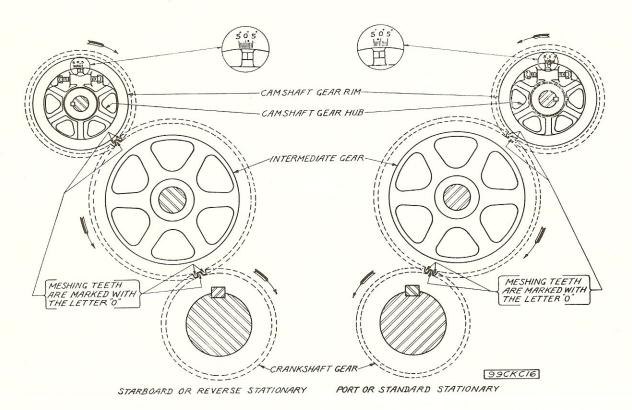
Camshaft Timing - "VB" Injection Pumps
